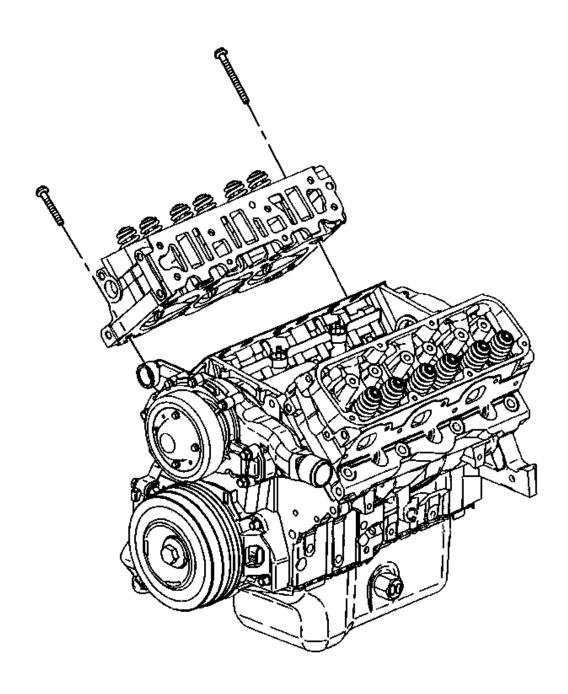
Right Cylinder Head Gasket Courtesy of GENERAL MOTORS CORP.
